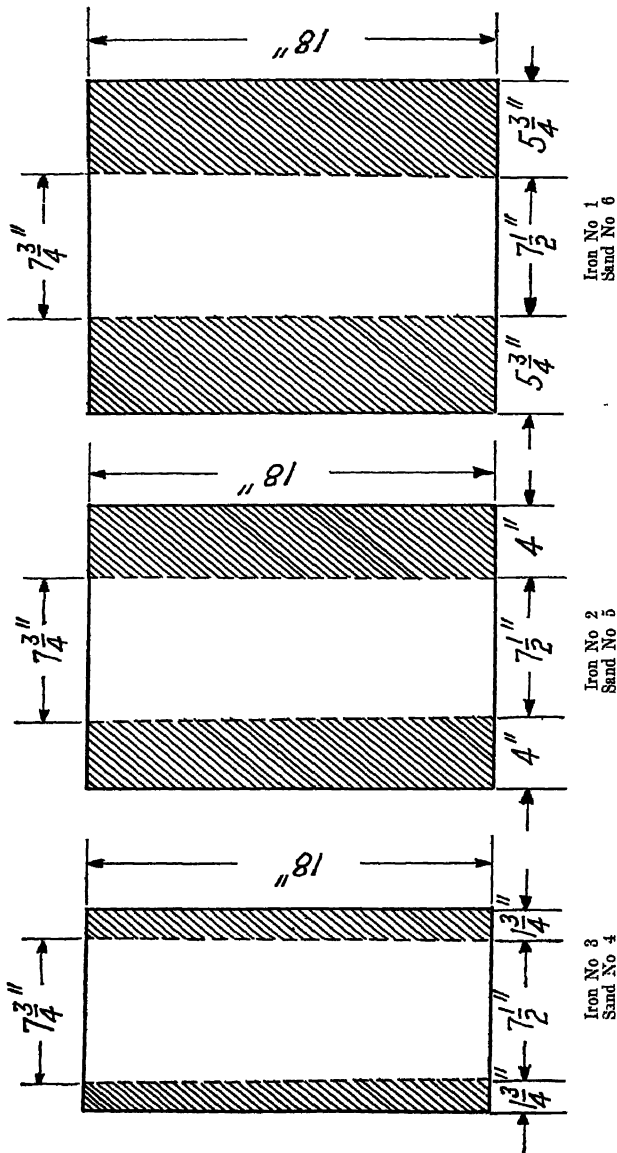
DIMENSIONS OF IRON AND SAND MOLDS.
